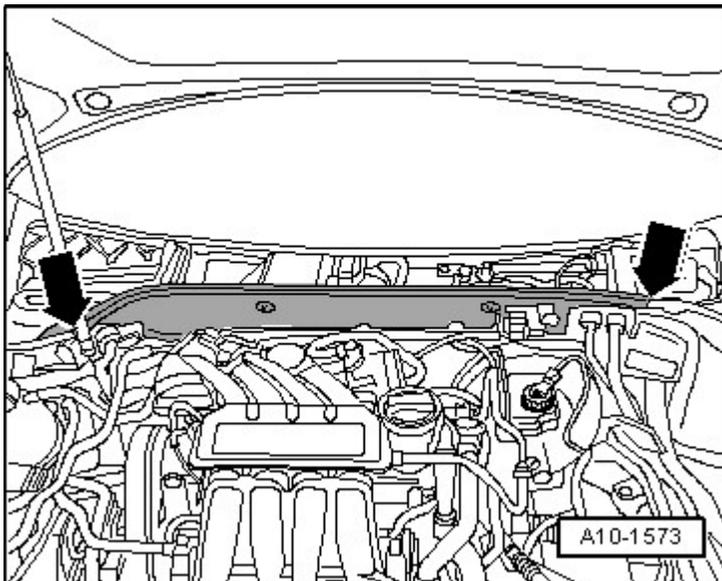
Identifying Plenum Chamber Bulkhead And Bolts
